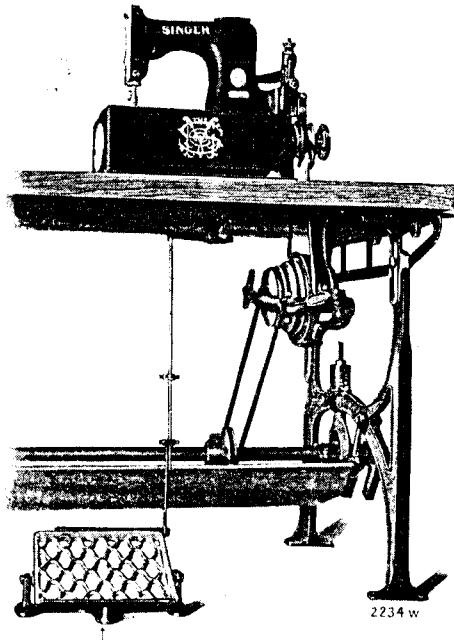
MACHINE NO. 116w2, WITH TRANSMITTER NO. 222923
